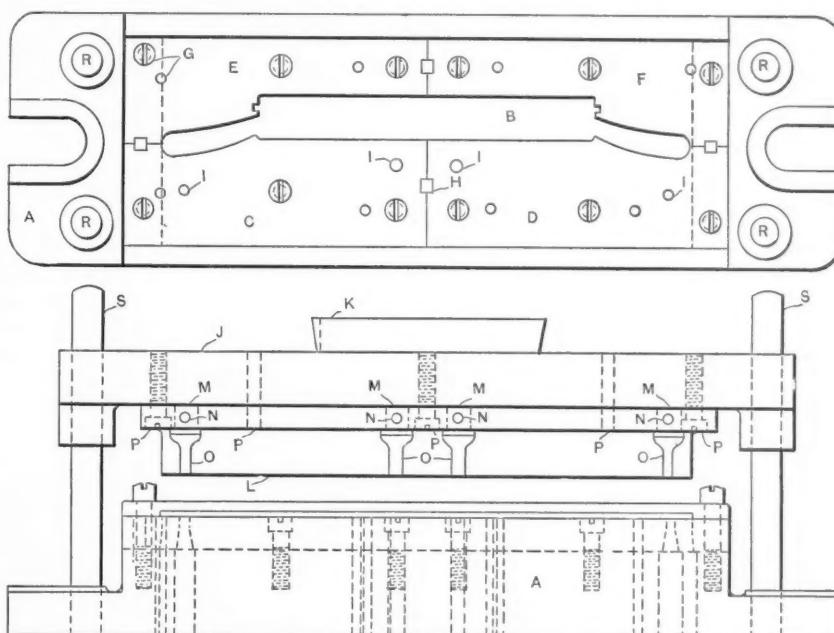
Plan and Elevation of Sub-press Die for Making Spring shown in Fig. 1
